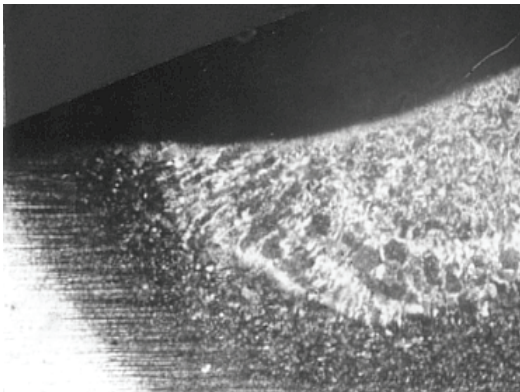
The welding toe shape after TIG-dressing 10X
